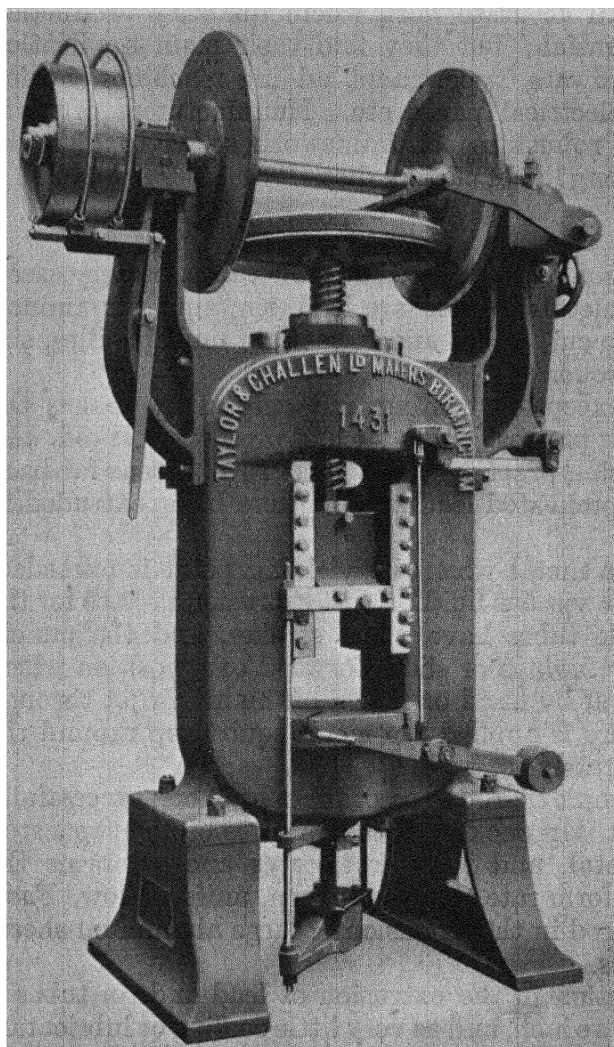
MODERN FRICTION-WHEEL PRESS
